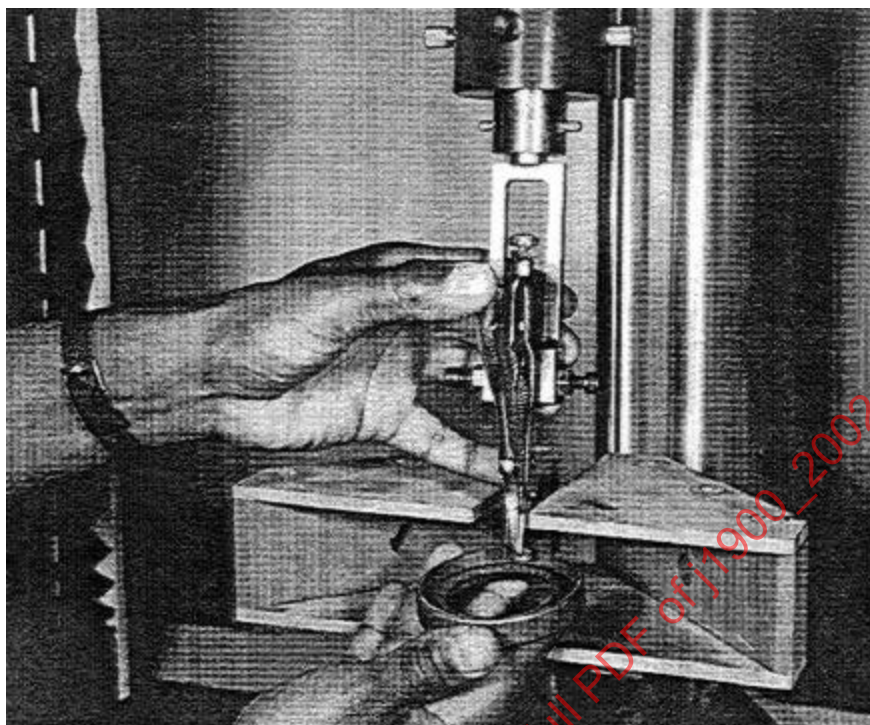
MECHANICAL CLAMP ALTERNATIVE (UPPER FIXTURE)
